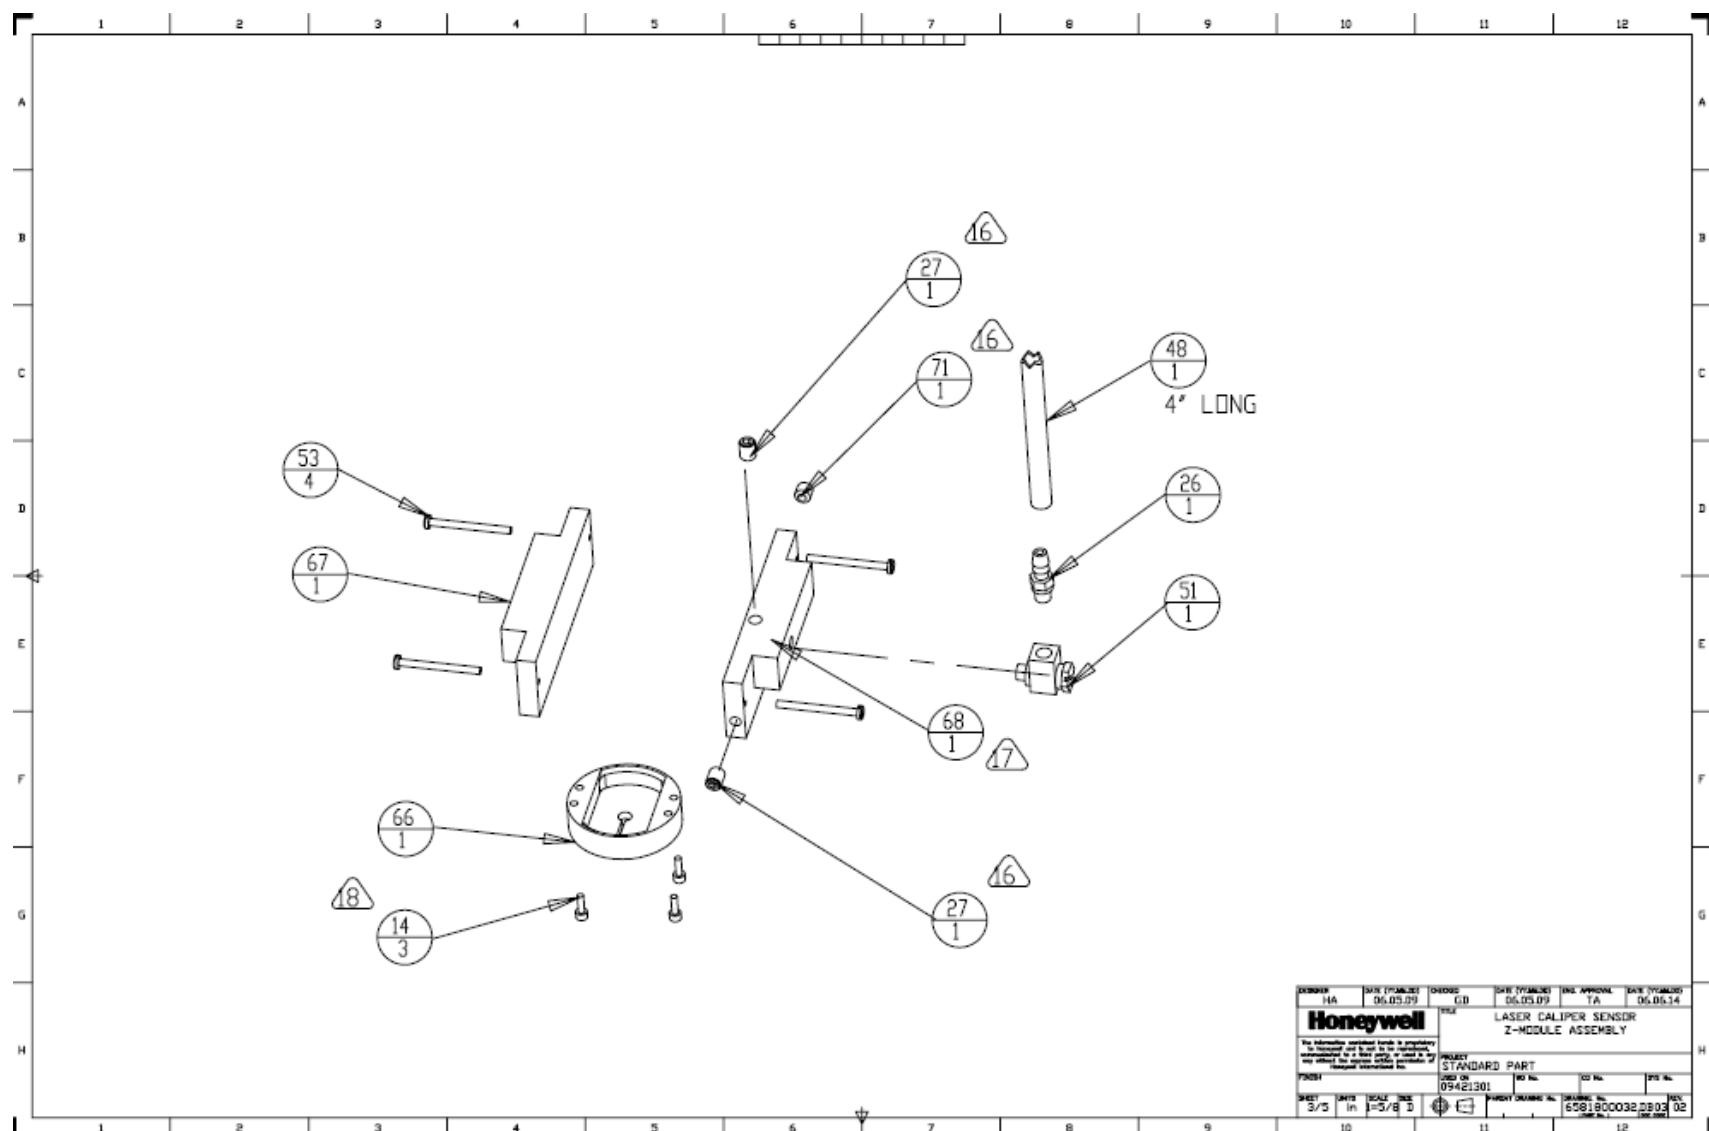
6581800032: laser caliper sensor z-module assembly (3/5)
